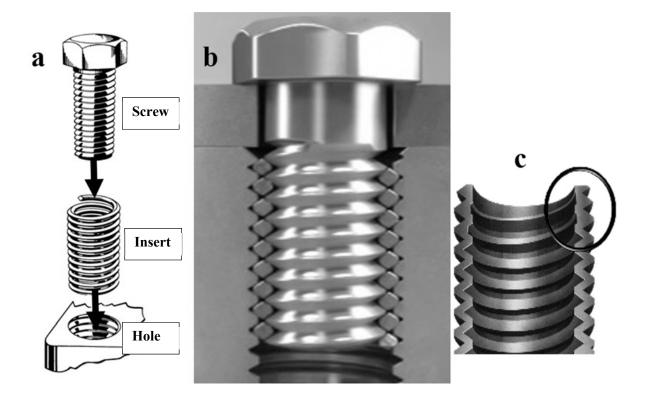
Thread insert and installation procedure a) Thread inserts are always necessary when applying threaded fasteners in soft metal detail component. Typical procedure shown to place these inserts into oversized holes b) Cross sectional view of inserts after placement in hole. c) Cross sectional view of a type of insert made from hard material like stainless steel.
